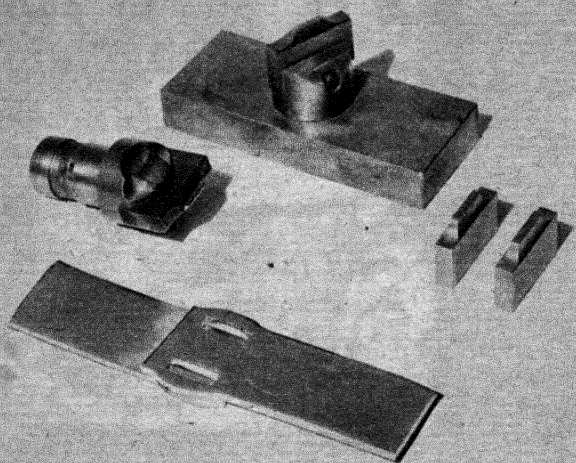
Simplest form of dies, as used for making short straight weld shown in foreground.
